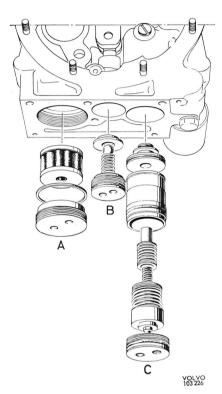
Installation of fine filter, oil pump check valve and relief valve
